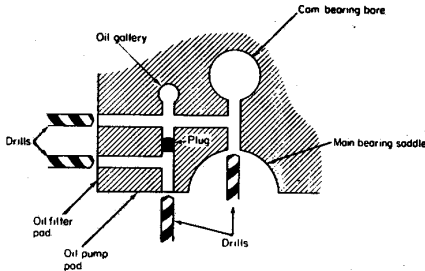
Typical oil hole drilling in the main bearing web.
